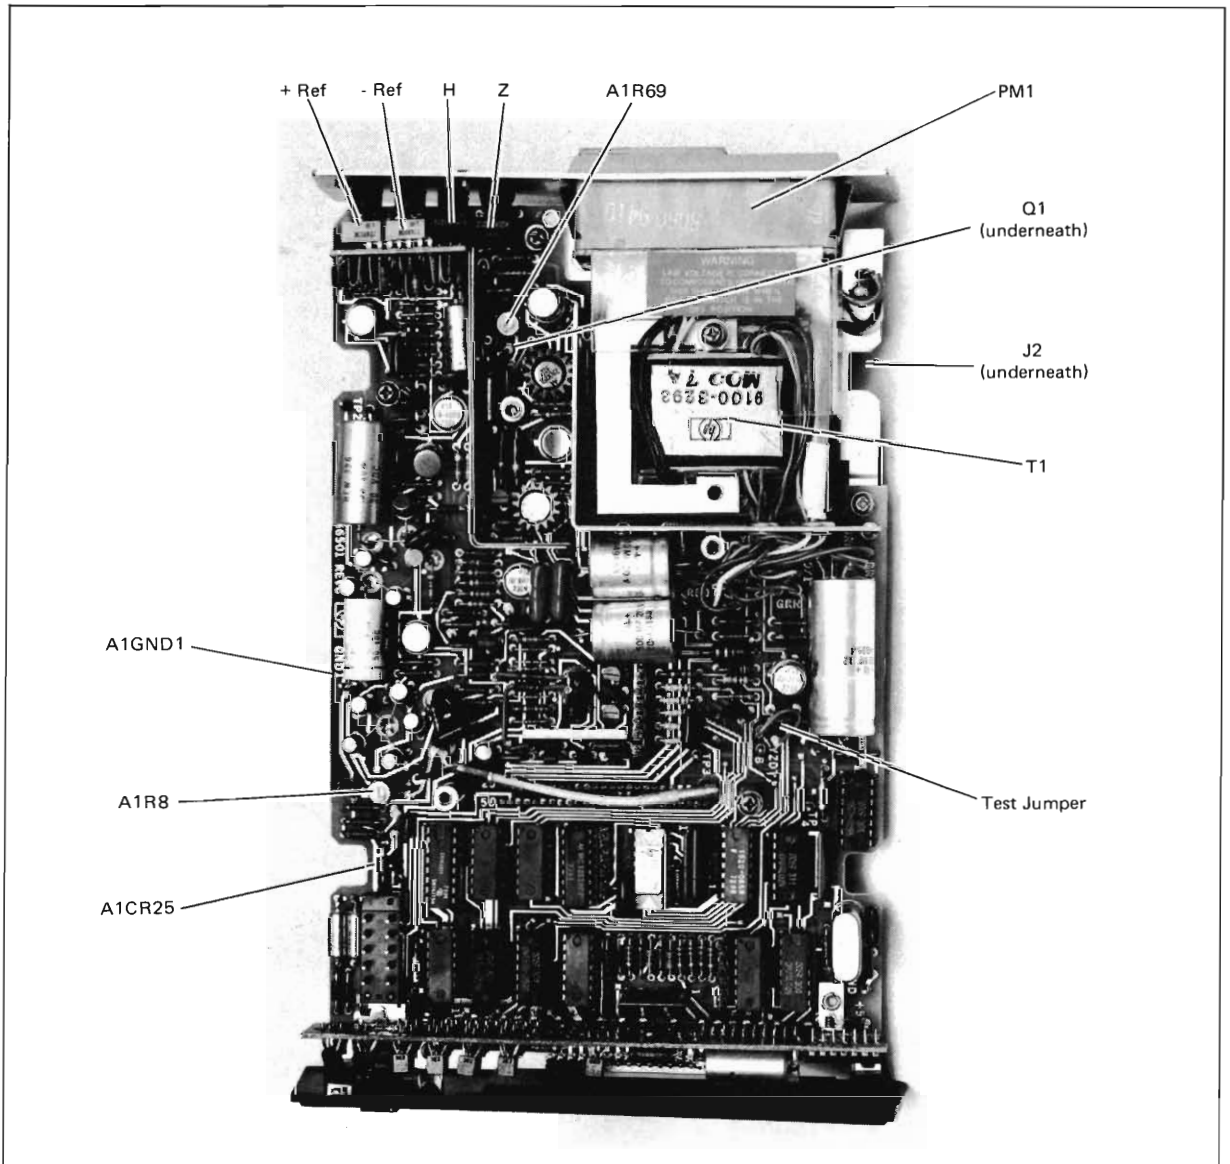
Chassis Mounted Component and Adjustment Locator.
